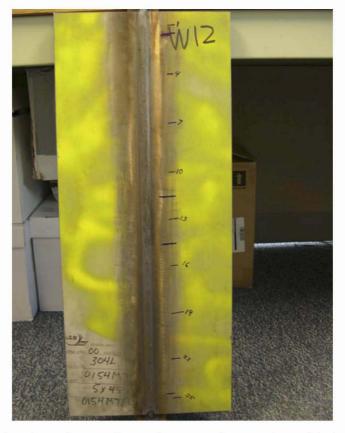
Markings showing where radiographs were taken on the welded plate.
